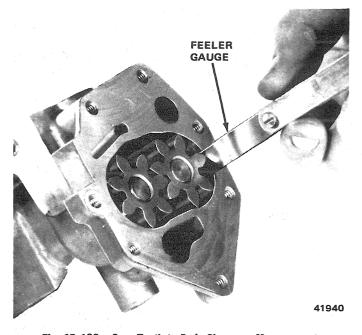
B-129 Gear Tooth-to-Body Clearance Measurement
